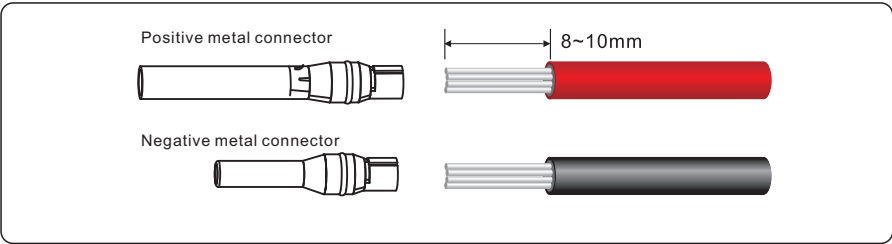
Removing insulation layer for DC cable (unit: mm)
